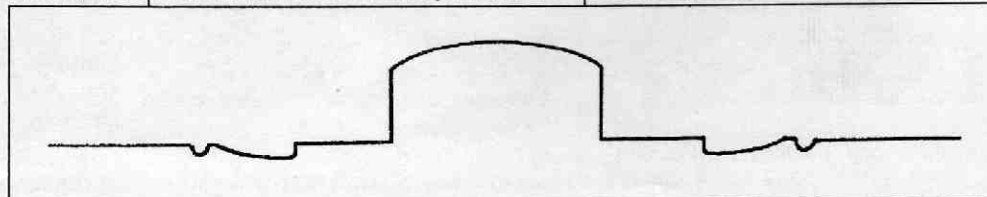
A scale drawing of the cross-section of the decorative grooves on the tailplates.
